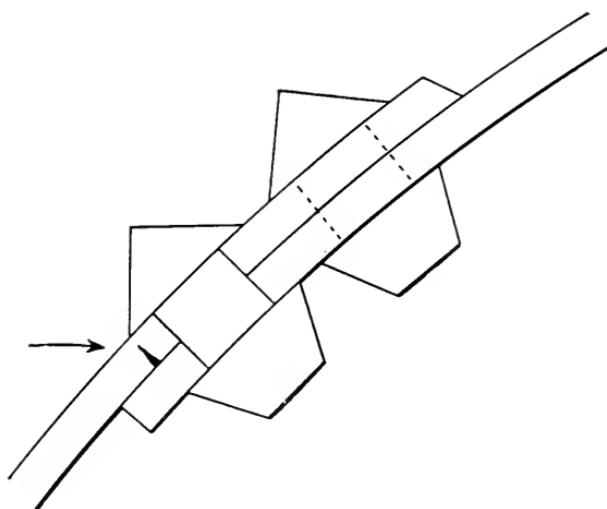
ILLUSTRATING THE HIDDEN CRACK WHICH CAUSED THE EXPLOSION.
